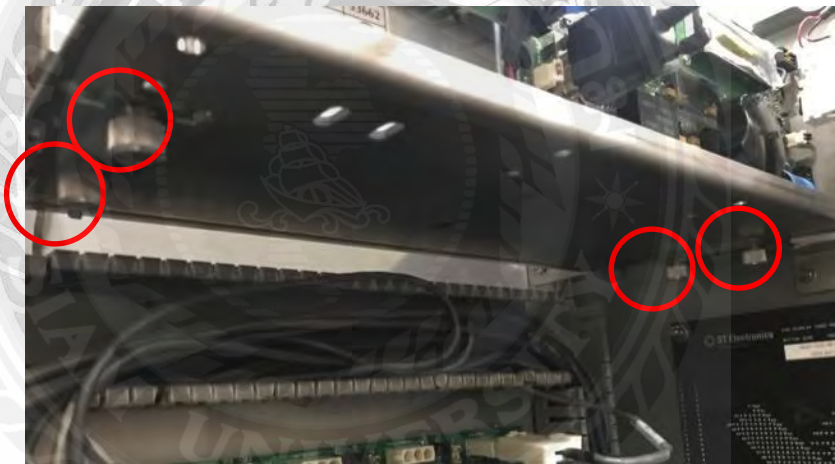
Location of the 4 Screws to be Remove Under the Eltra-Transport Mounting Racket
